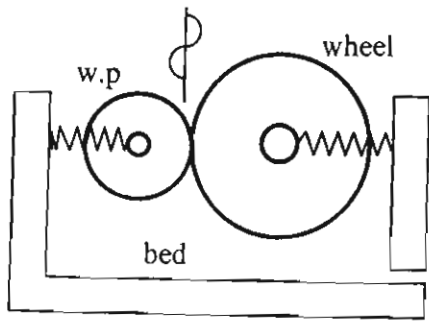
The grinding wheel-workpiece interaction in cylindrical plunge grinding operation
